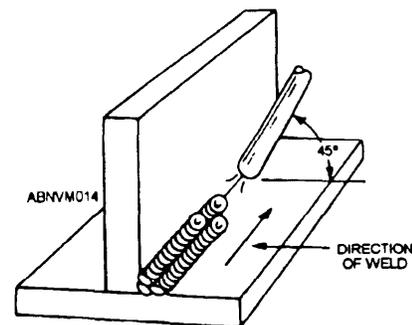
Fillet welding a T-joint (flat position).
